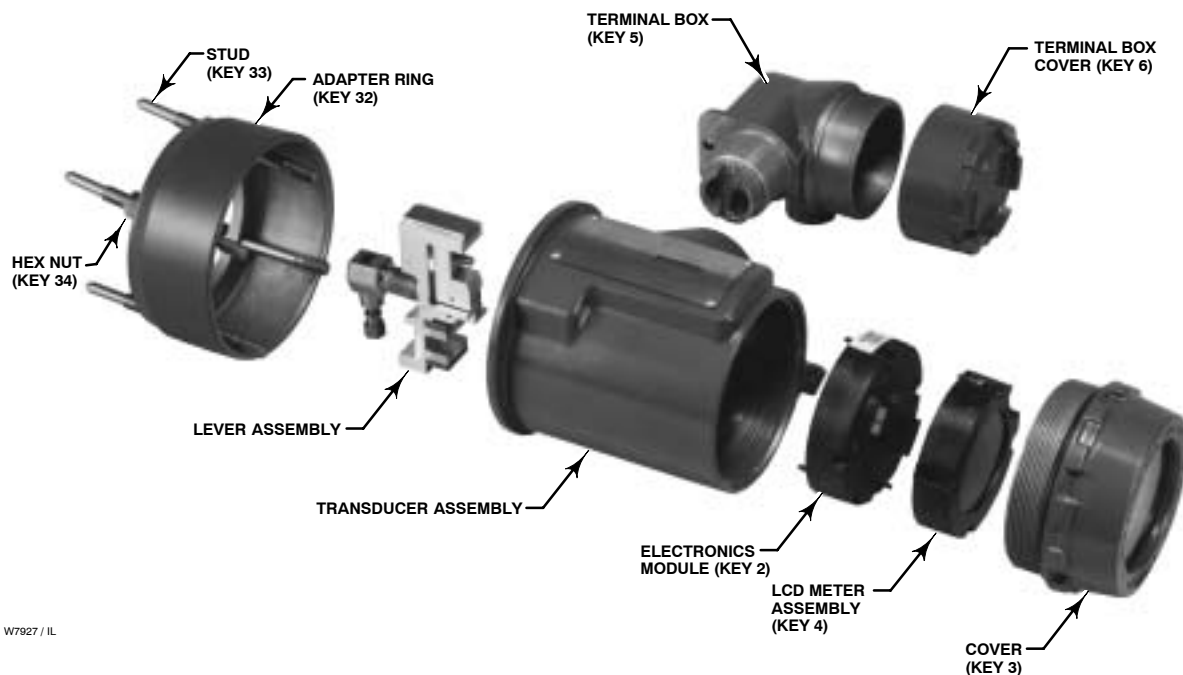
DLC3000 Series Digital Level Controller Assembly
